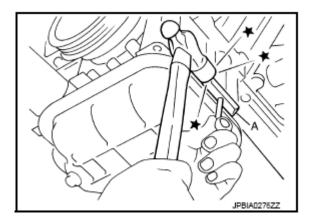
Removing Seal From Upper And Lower Oil Pan Using Tool Courtesy of NISSAN NORTH AMERICA, INC.
